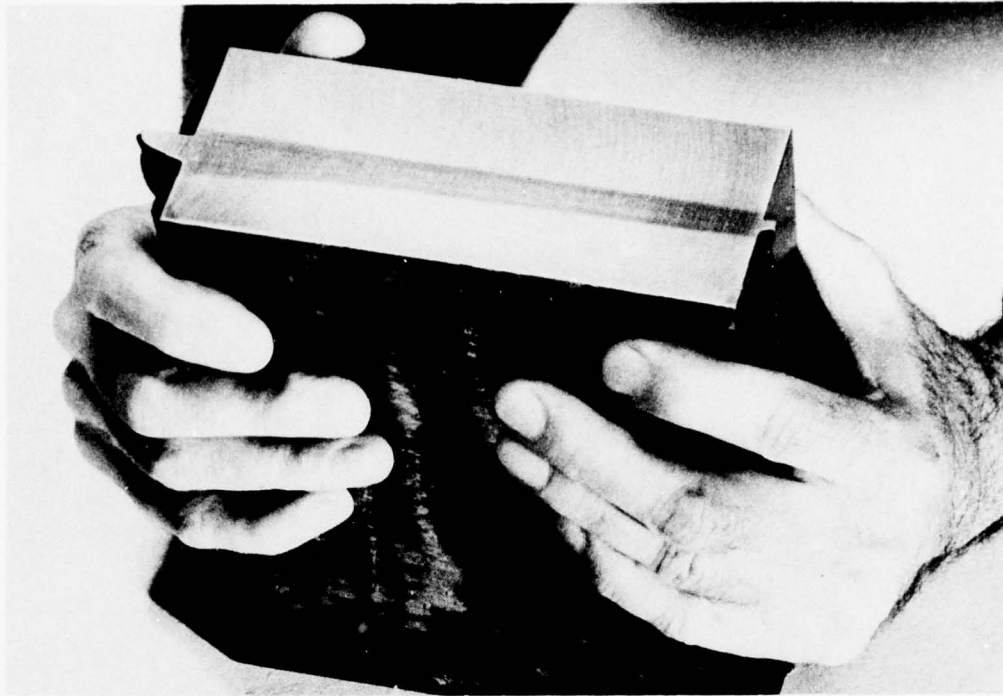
Section of electron beam weld made in 150mm thick steel at 150mm/min travel speed.
